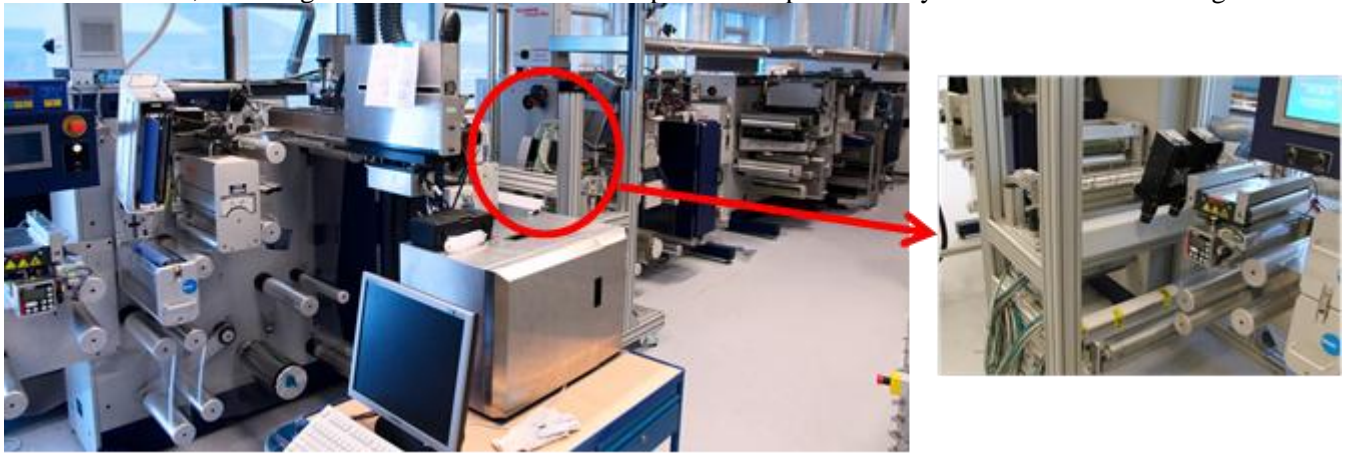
Optical inspection tool assembly in the DTU R2R line.
